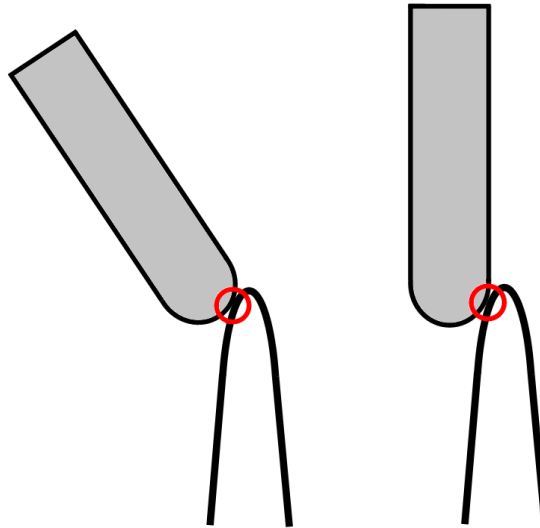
A diagram showing how the tool angle can affect which part of the tool is used to cut a surface
